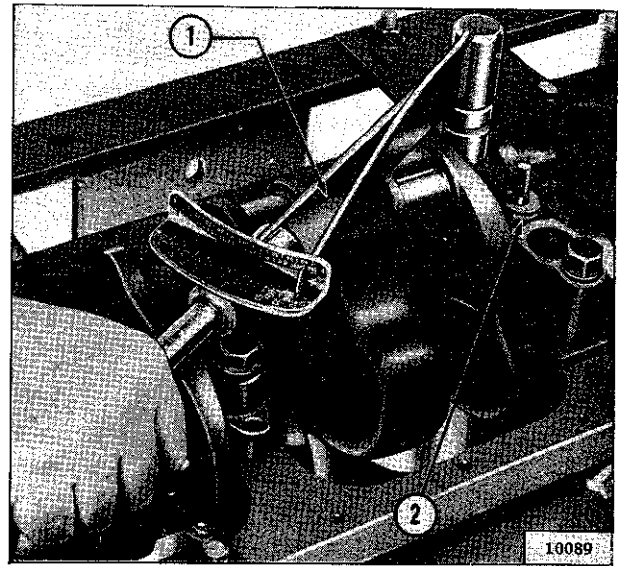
TIGHTENING MAIN BEARING CAP BOLTS
